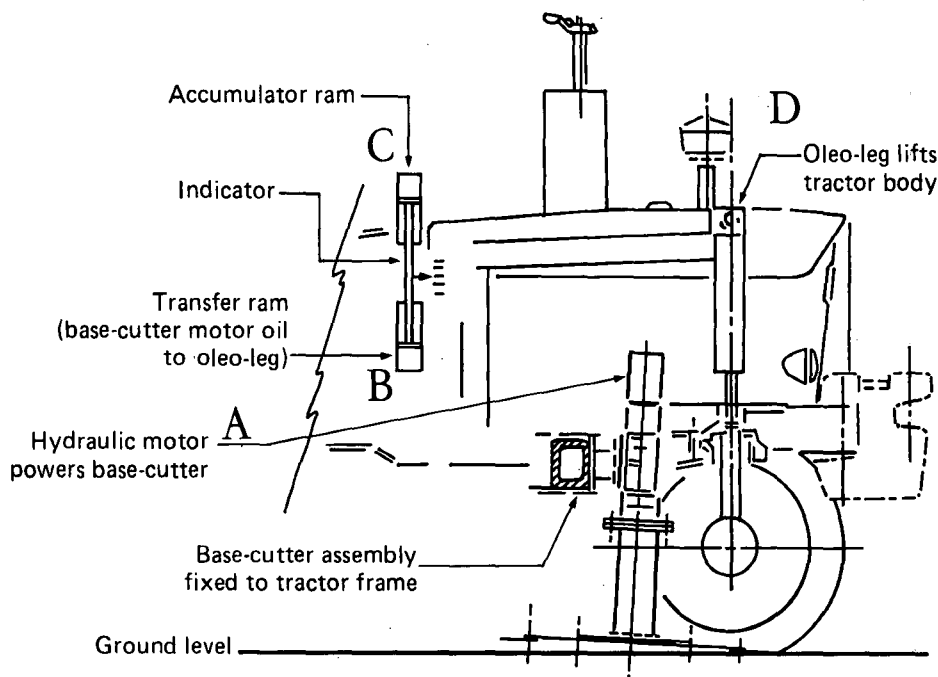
Base cutter assembly showing oleo-leg suspension.
